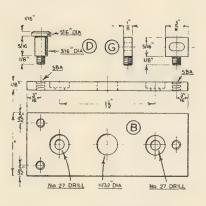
The motor plate B; the brake shoe pivots D; and the brake screw trunnion G
